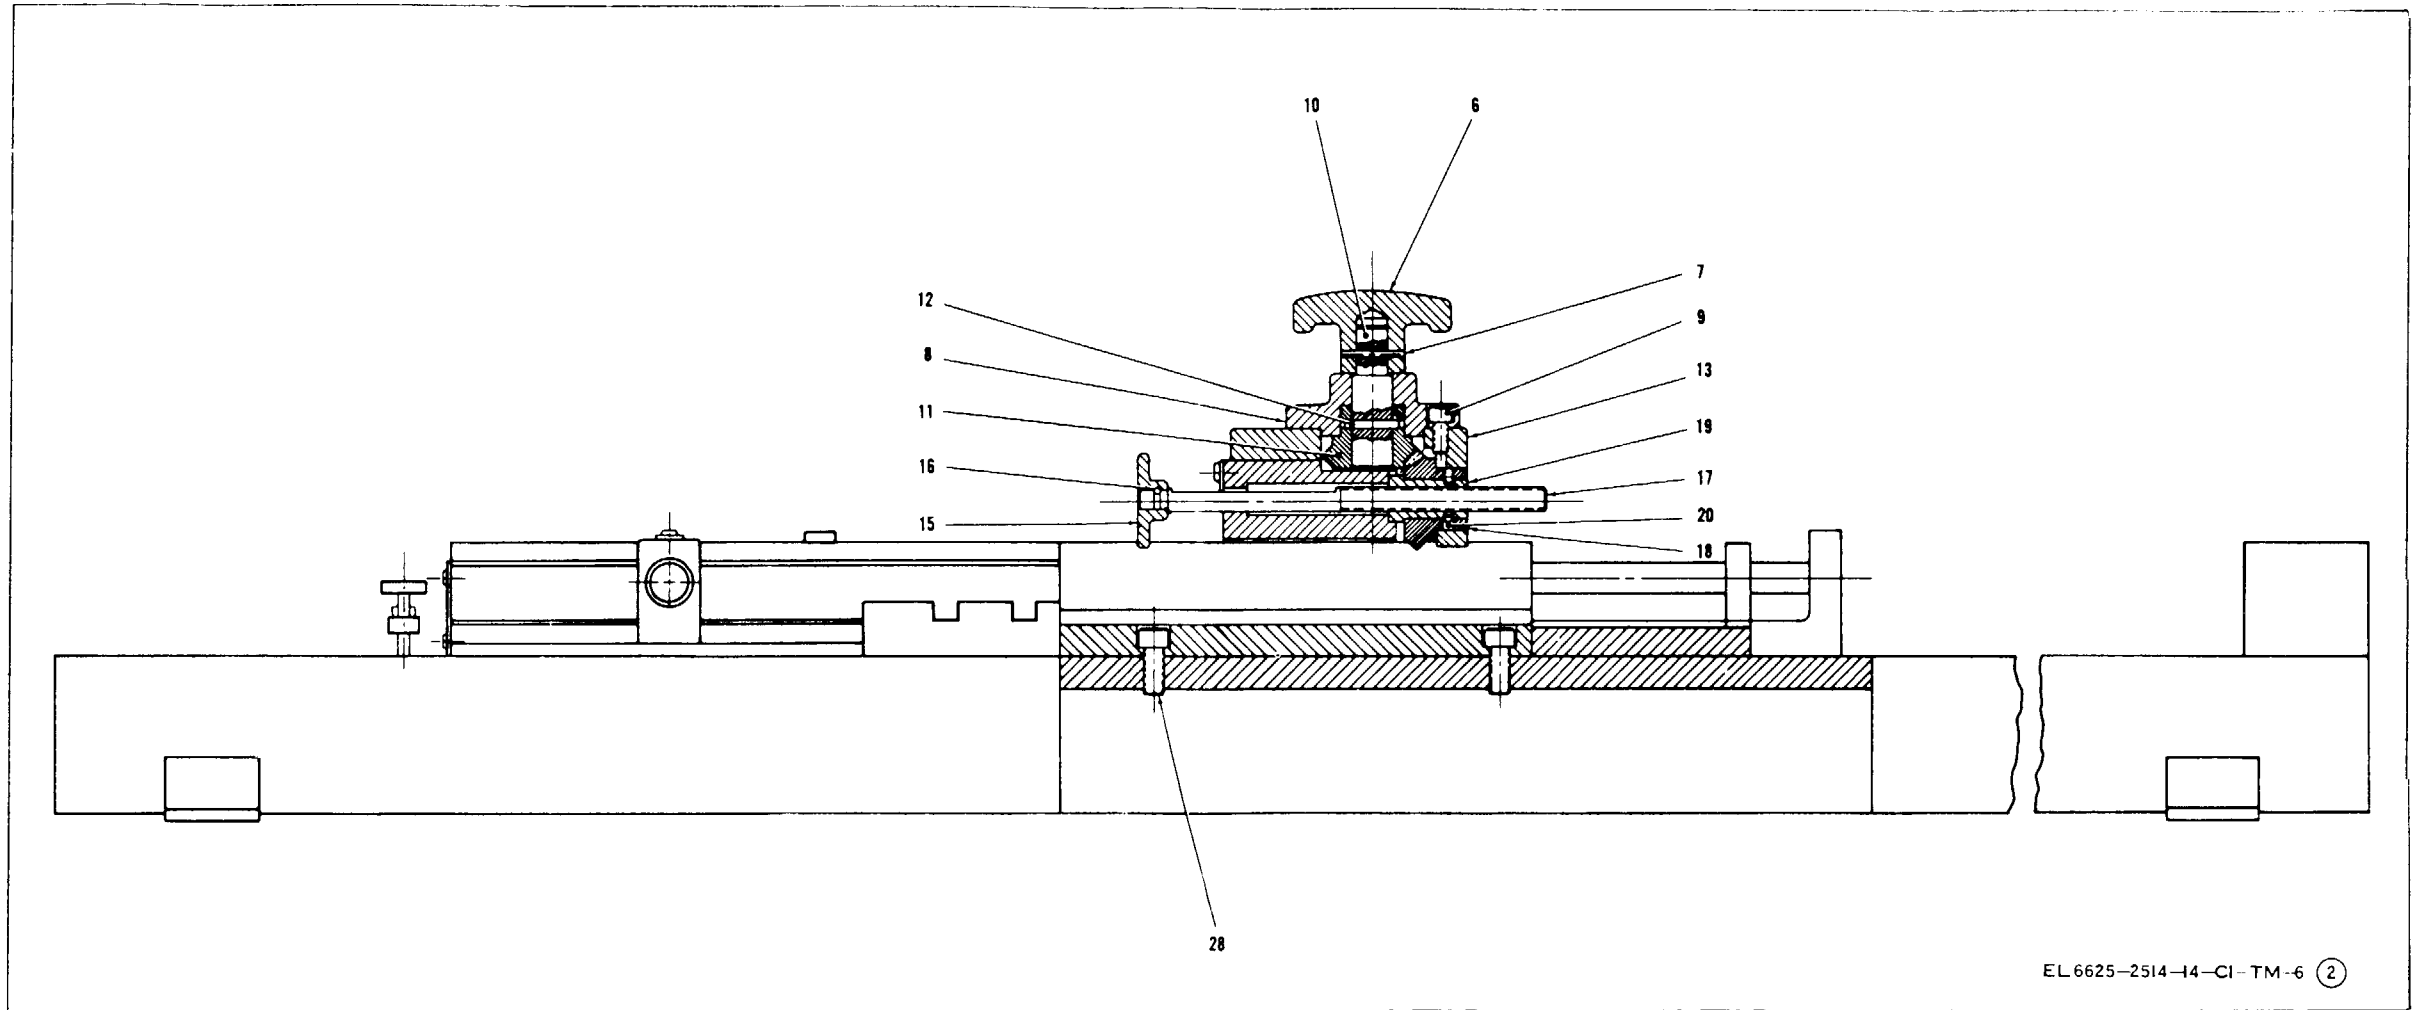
U7651 assembling fixture (sheet 2 of 2).
